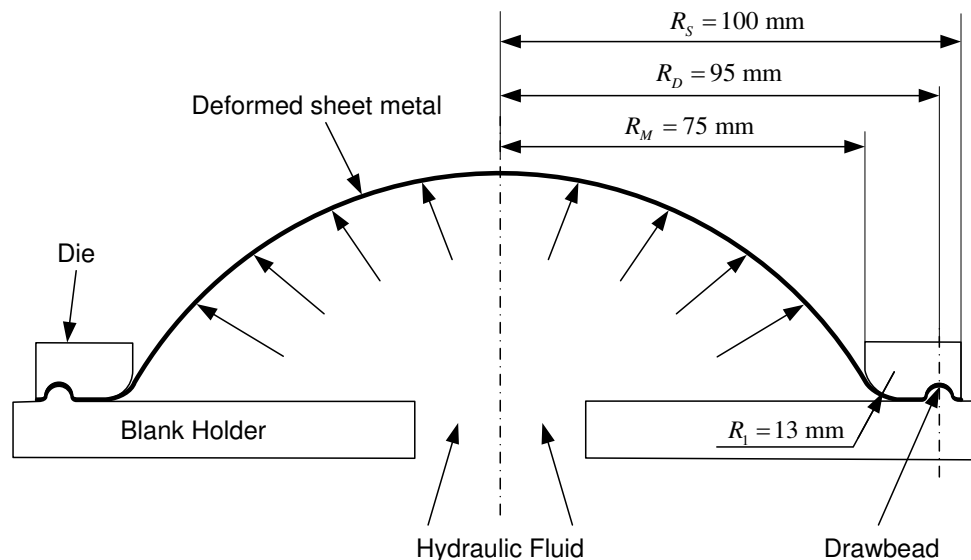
Bulge test, with the identification of the principal dimensions of the tool according to Santos *et al.* [32].
